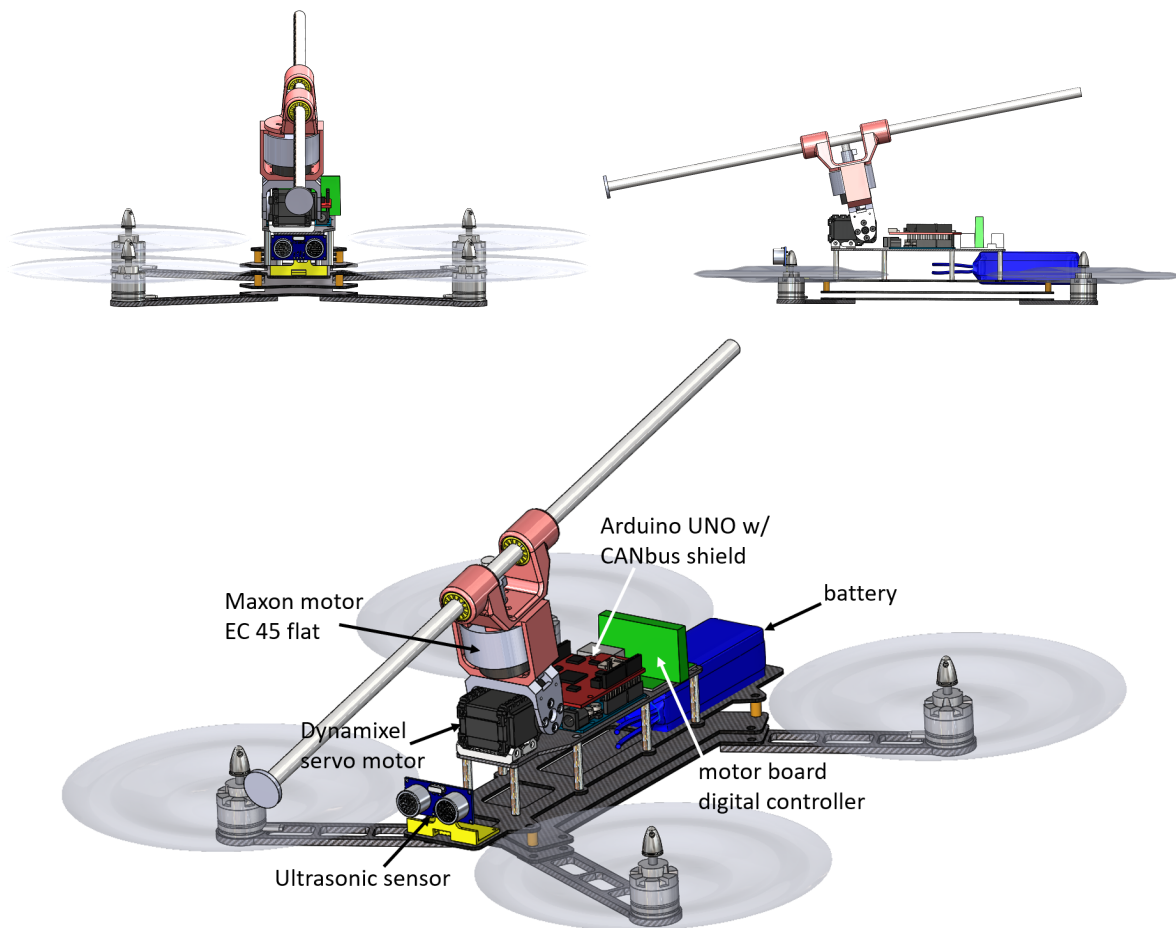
CAD drawings of the overall aerial system and components layout.
